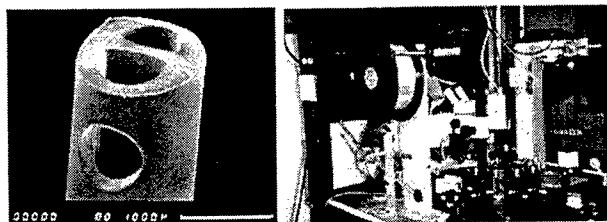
Excimer laser manufacture of blood gas sensor (a) KrF laser-drilled hole in side of PVC bilumen catheter; (b) Automated reel-to-reel fibre hole-drilling system
